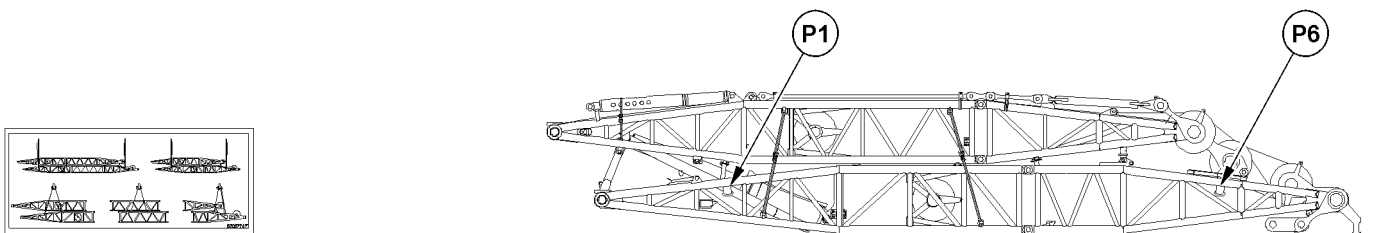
Fastening points Transport unit T1 and T3 assembled
